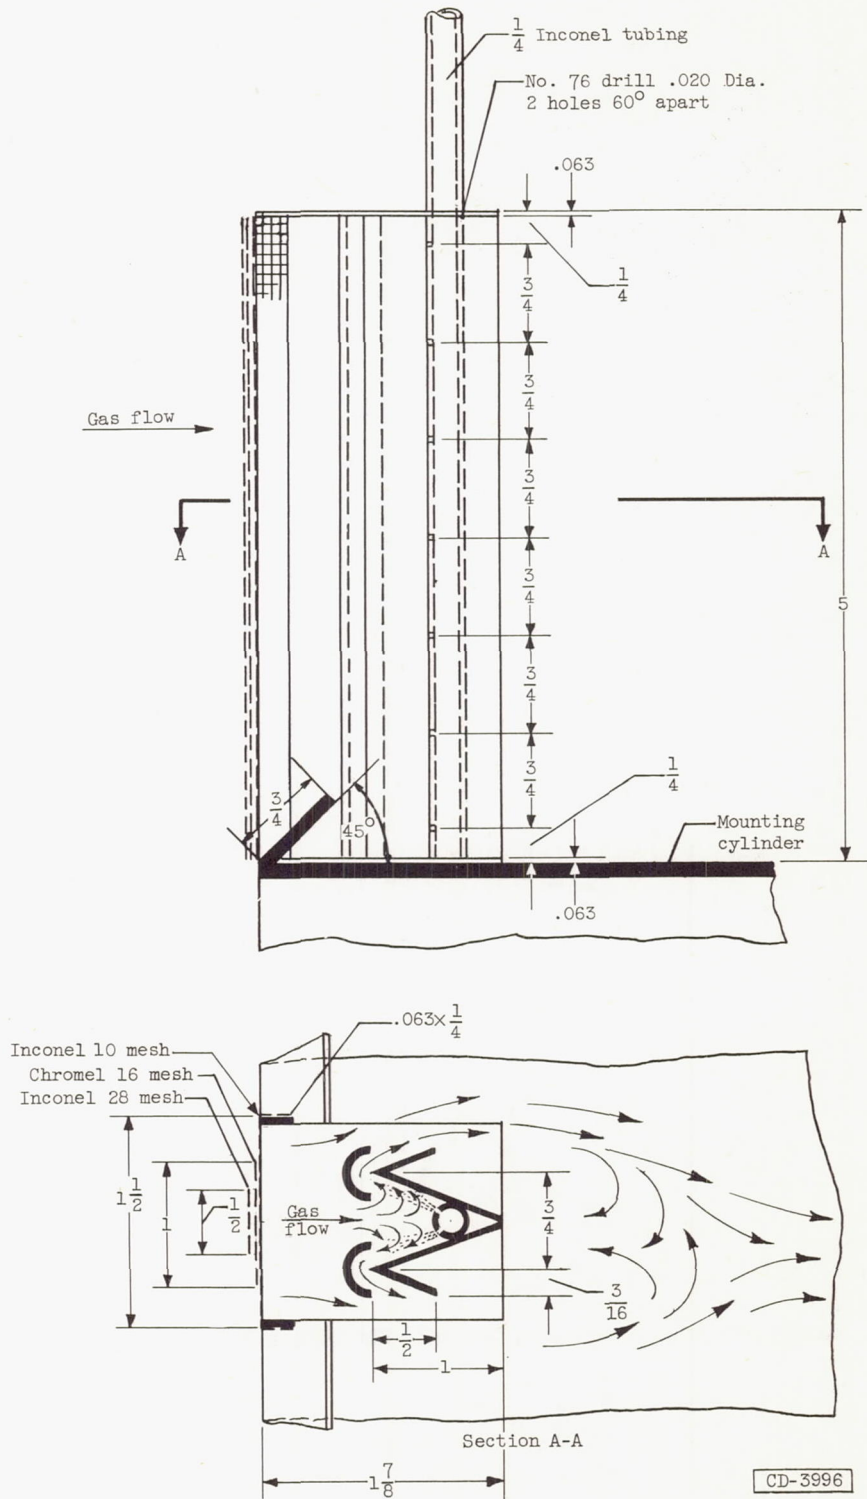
Sketches of type 7 flame holding elements investigated. (All dimensions in inches.)
